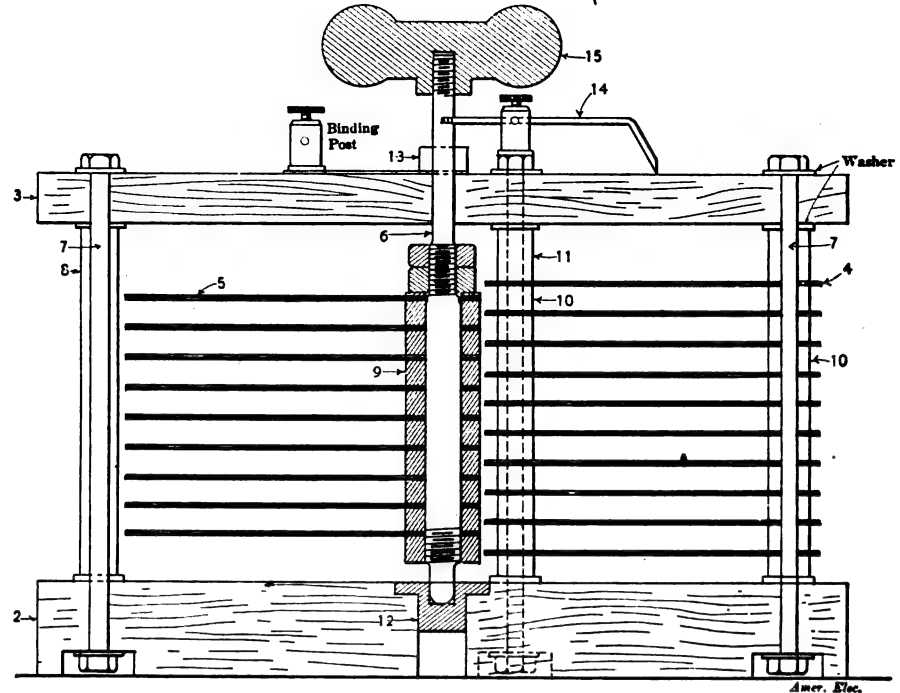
COMPLETE SECTIONAL VIEW OF CONDENSER, HALF SIZE.
